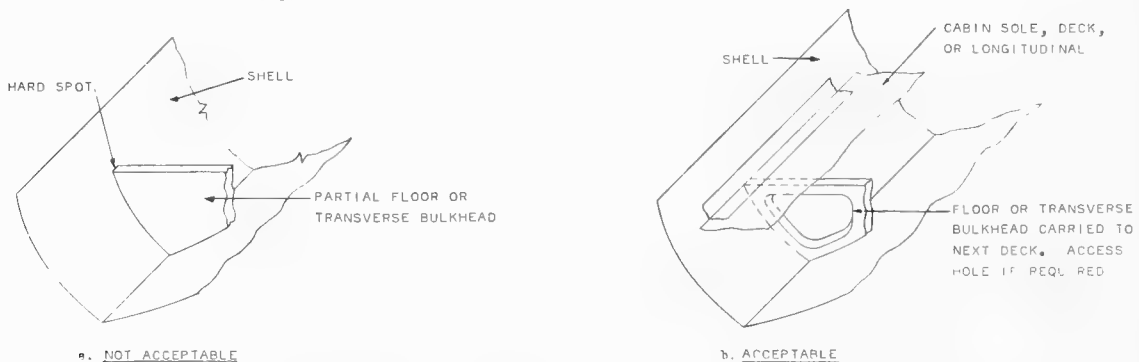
Hard Spot - Partial Floor or Transverse Bulkhead
